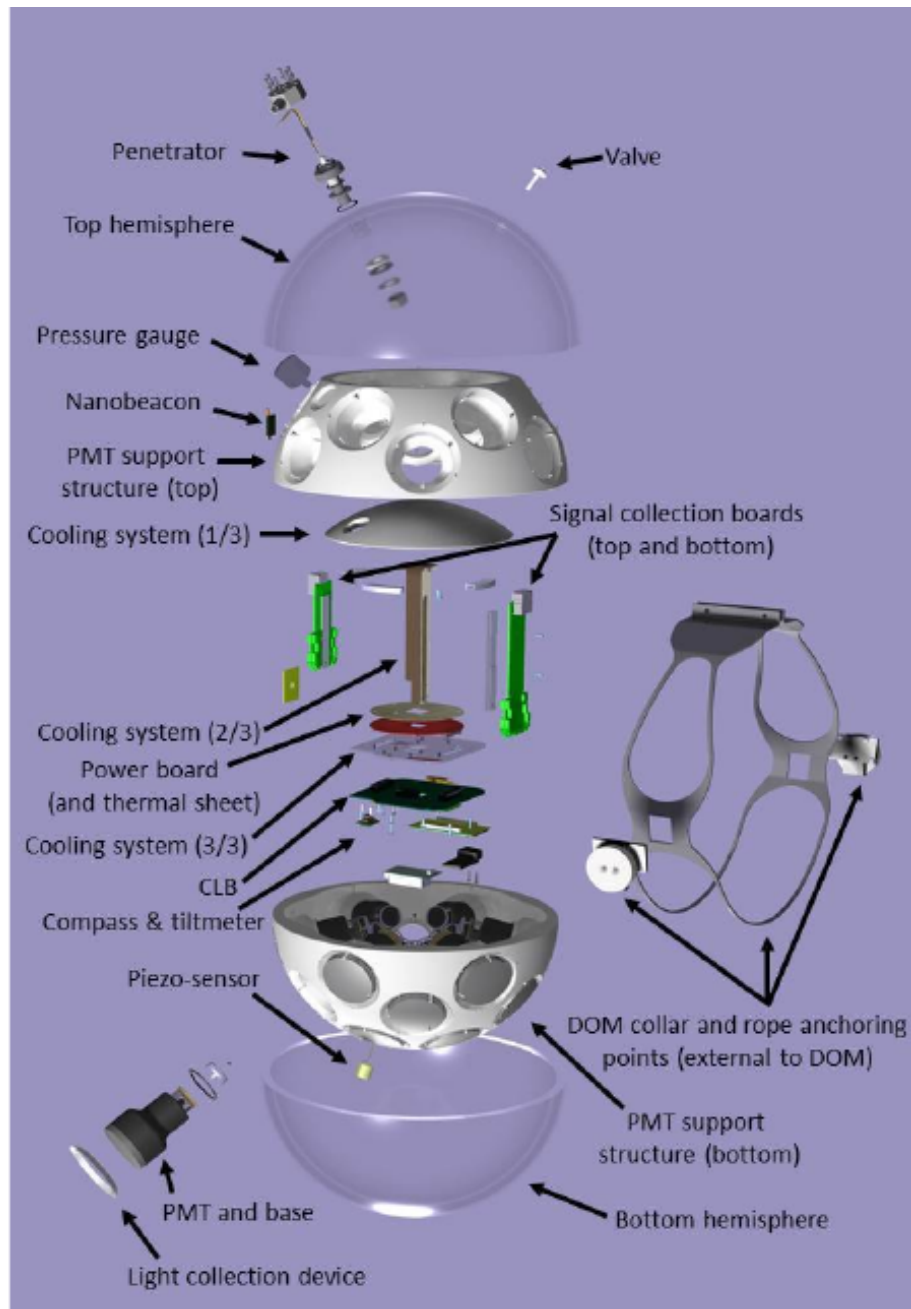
Exploded view of a KM3NeT Digital Optical Module (DOM). From [142].
